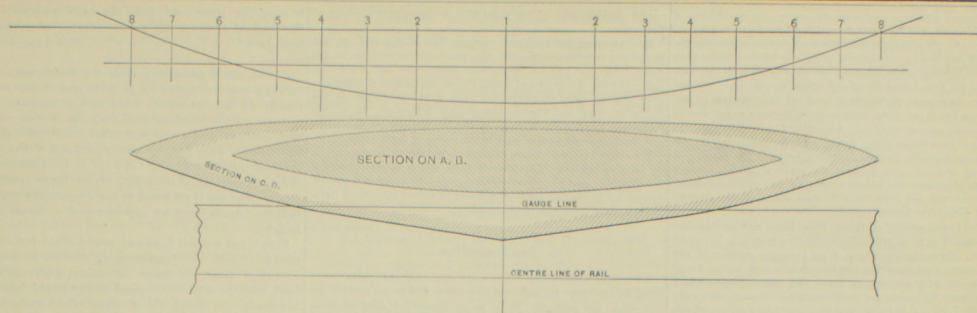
Elevation and Horizontal Section of a Flange made by Lobdell Car Wheel Co.
